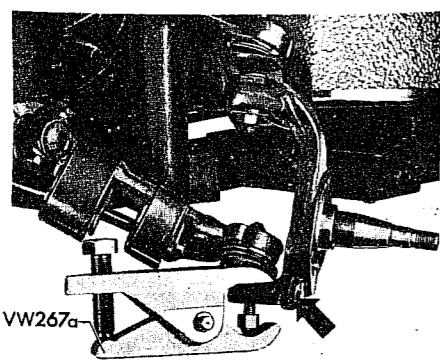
Disconnecting the lower ball joint stud from the steering knuckle - 181 models.
